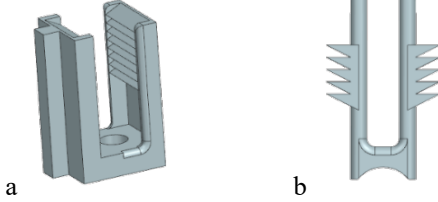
Model of two-piece clip, bottom-piece (a) and top-piece (b).
